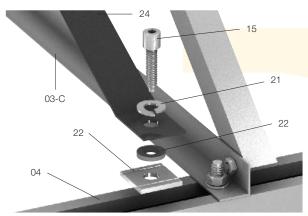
Fixing the Securing Cruciform and Mounting Rail
